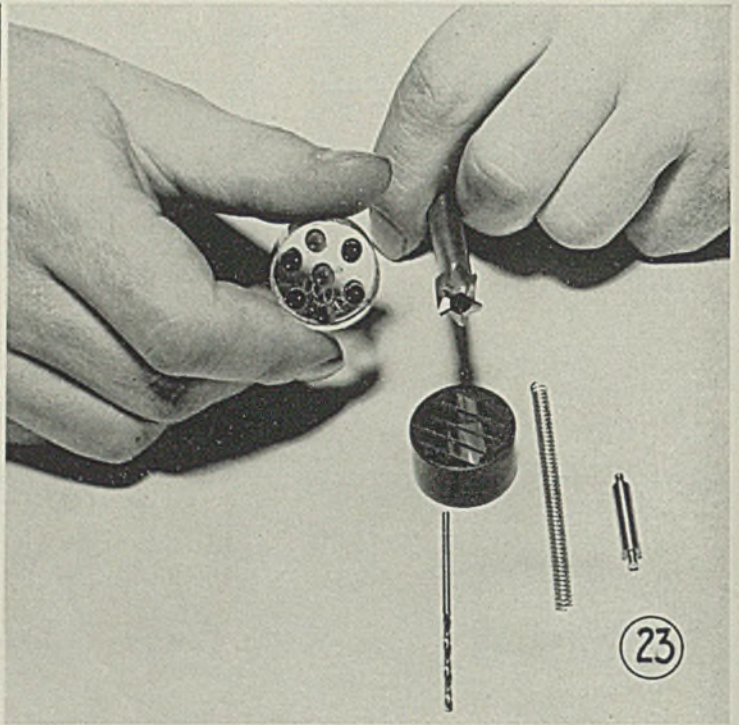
Hollow drill saves time in cutting test specimens, enables most parts to be sampled without weakening them, preserves surface of material for inspection
